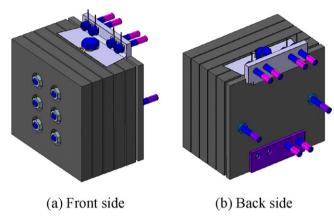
Typical IWS block of the design-C: (a) Front side; (b) Back side.
